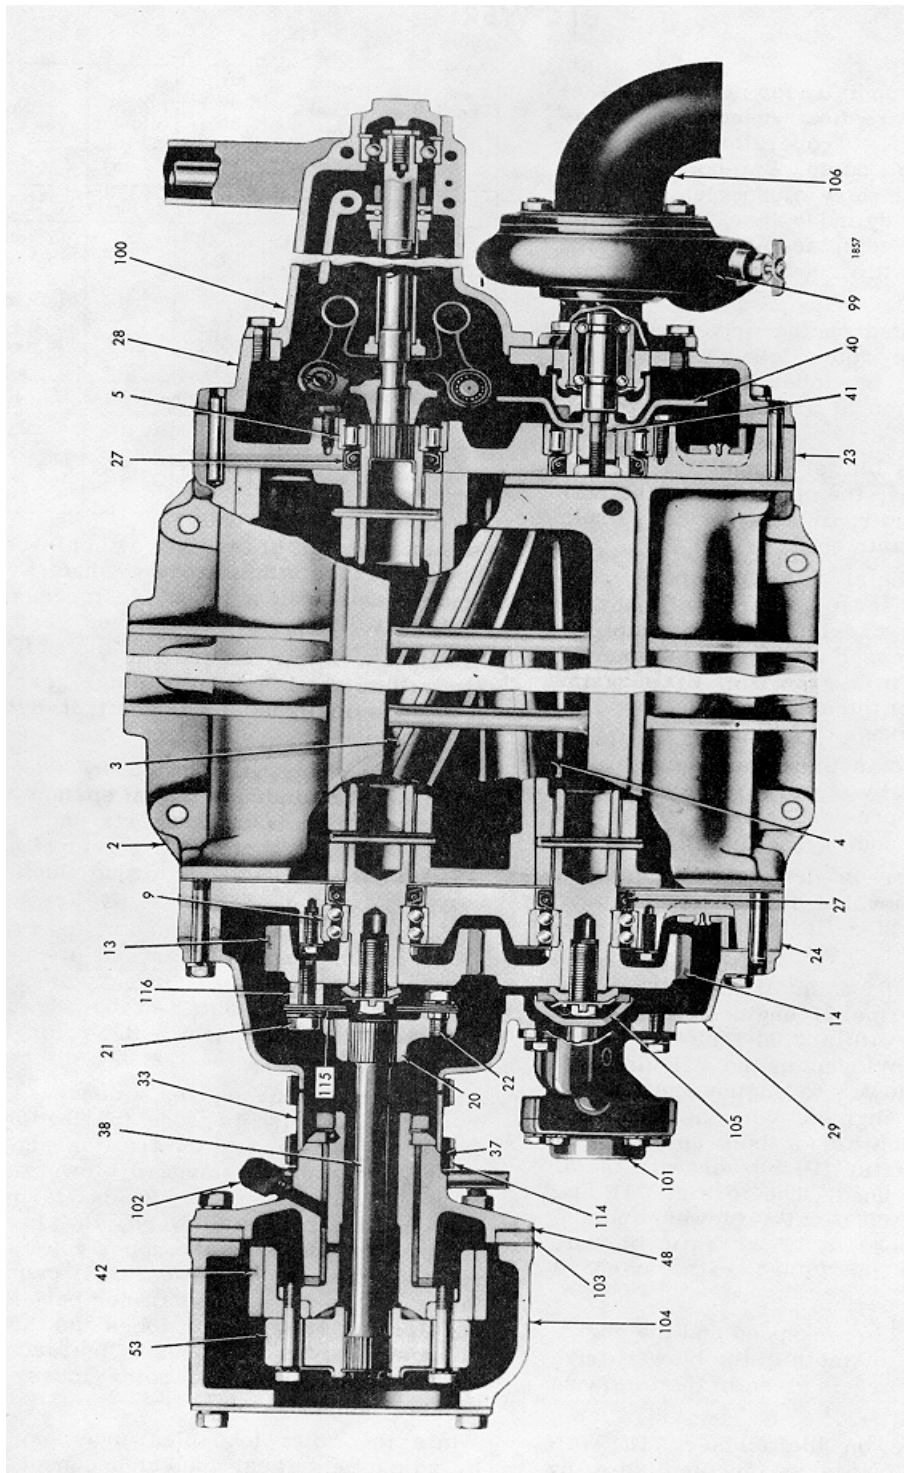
Blower and Drive Assembly and Accessories Including Mechanical Governor Attached to Standard Blower or Small Diameter Rotor Blower (71 Engines)
